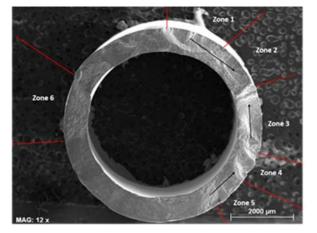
Front view of the A fracture surface. The black arrows indicate fracture propagation
